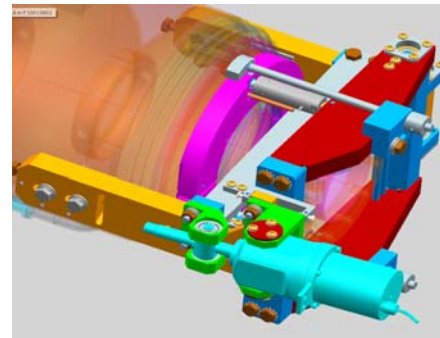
3-D model of the Tuner, assembled on the cavity/helium vessel system.
